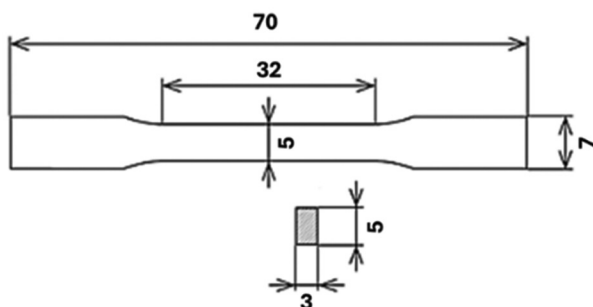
Drawing of printed samples for tensile tests (dimensions given in mm). Reprinted from Strakosova *et al.*<sup>18</sup>
